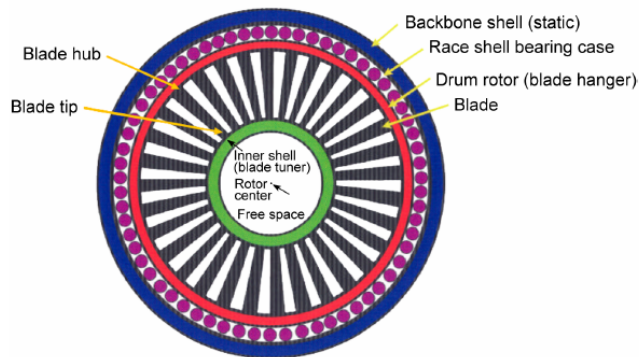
Exoskeletal engine concept projected view of the exoskeletal engine composite rotor.
